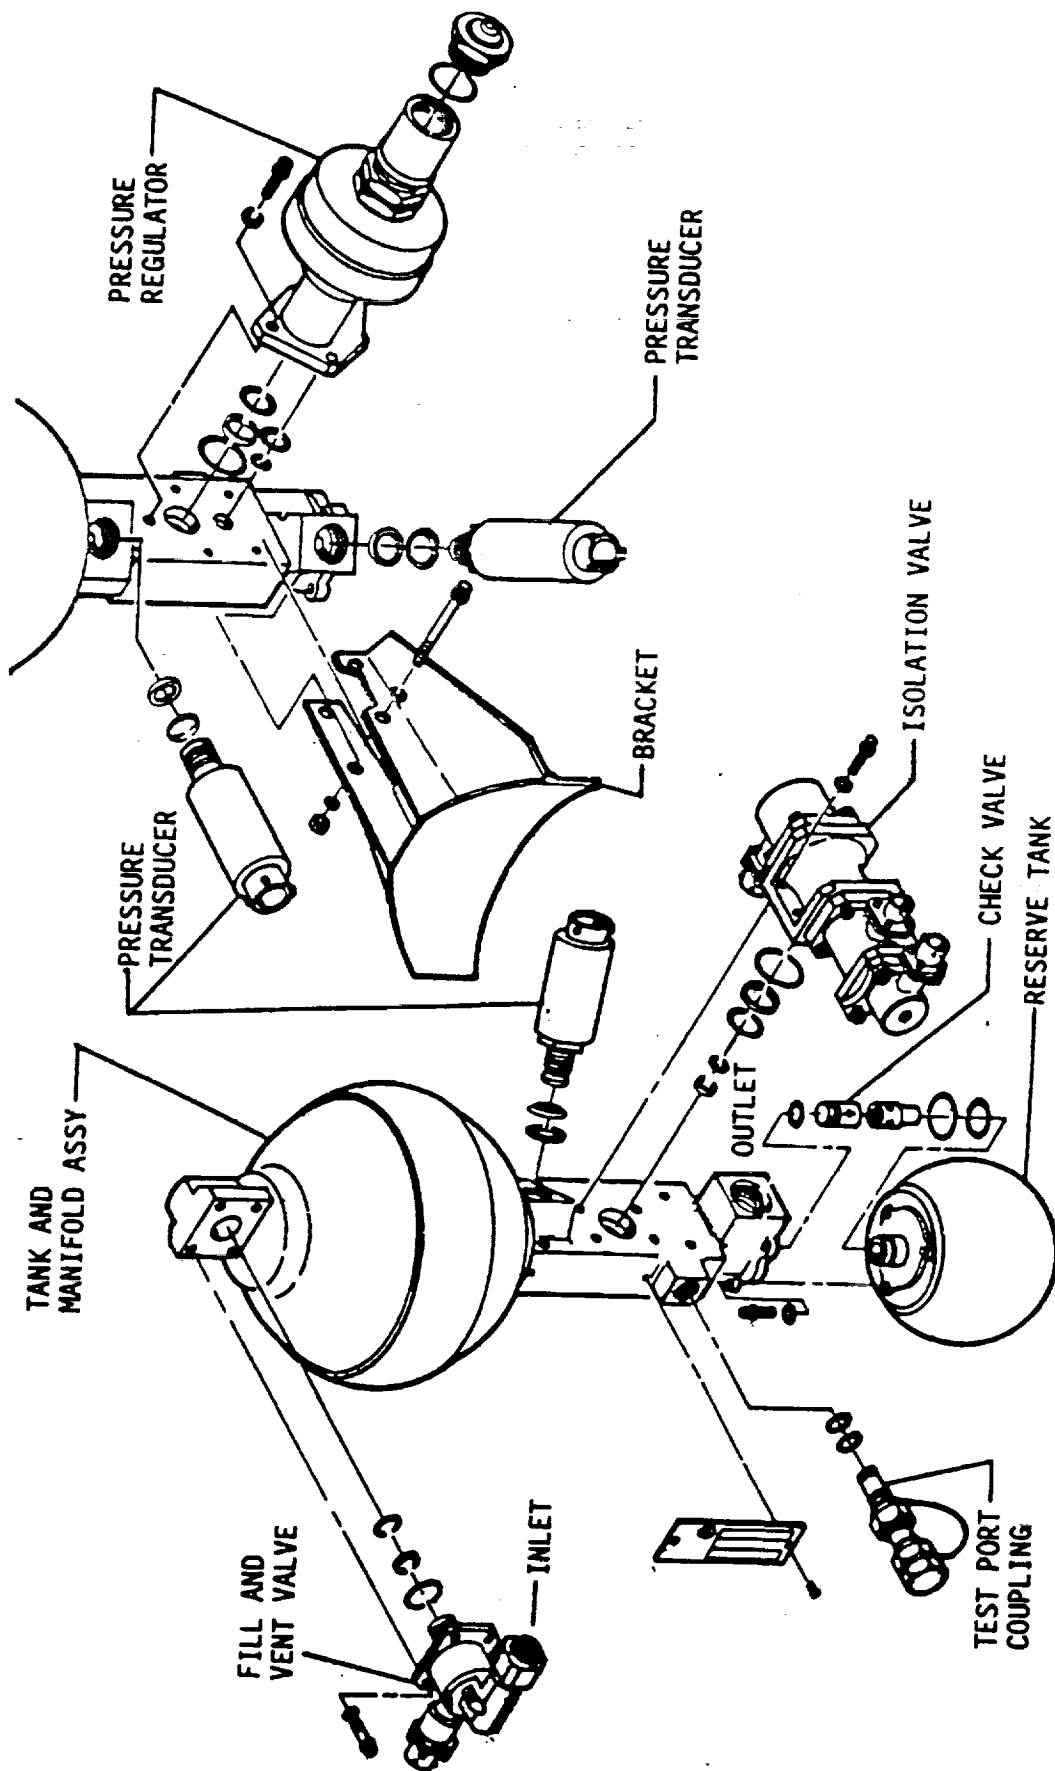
GN2 PNEUMATIC PACK ASSEMBLY
